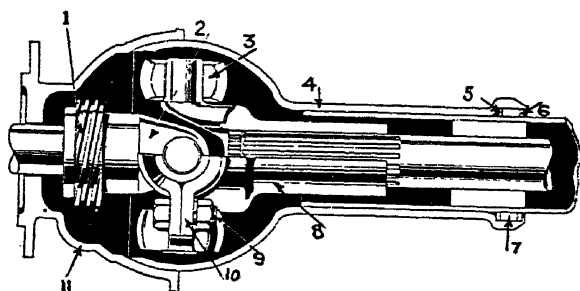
A Typical Front End Universal Joint for Propeller Shaft.
